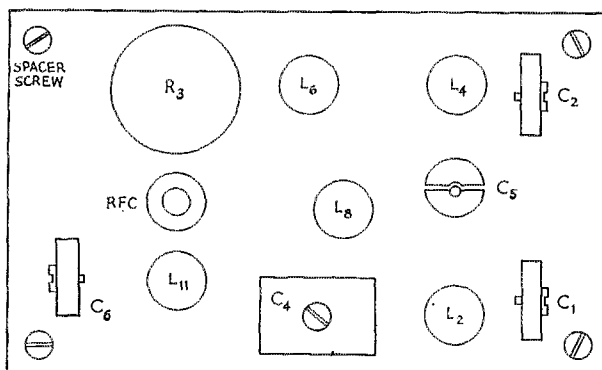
This sketch shows approximate placement of components on the reverse side of the board shown in Fig. 3.
